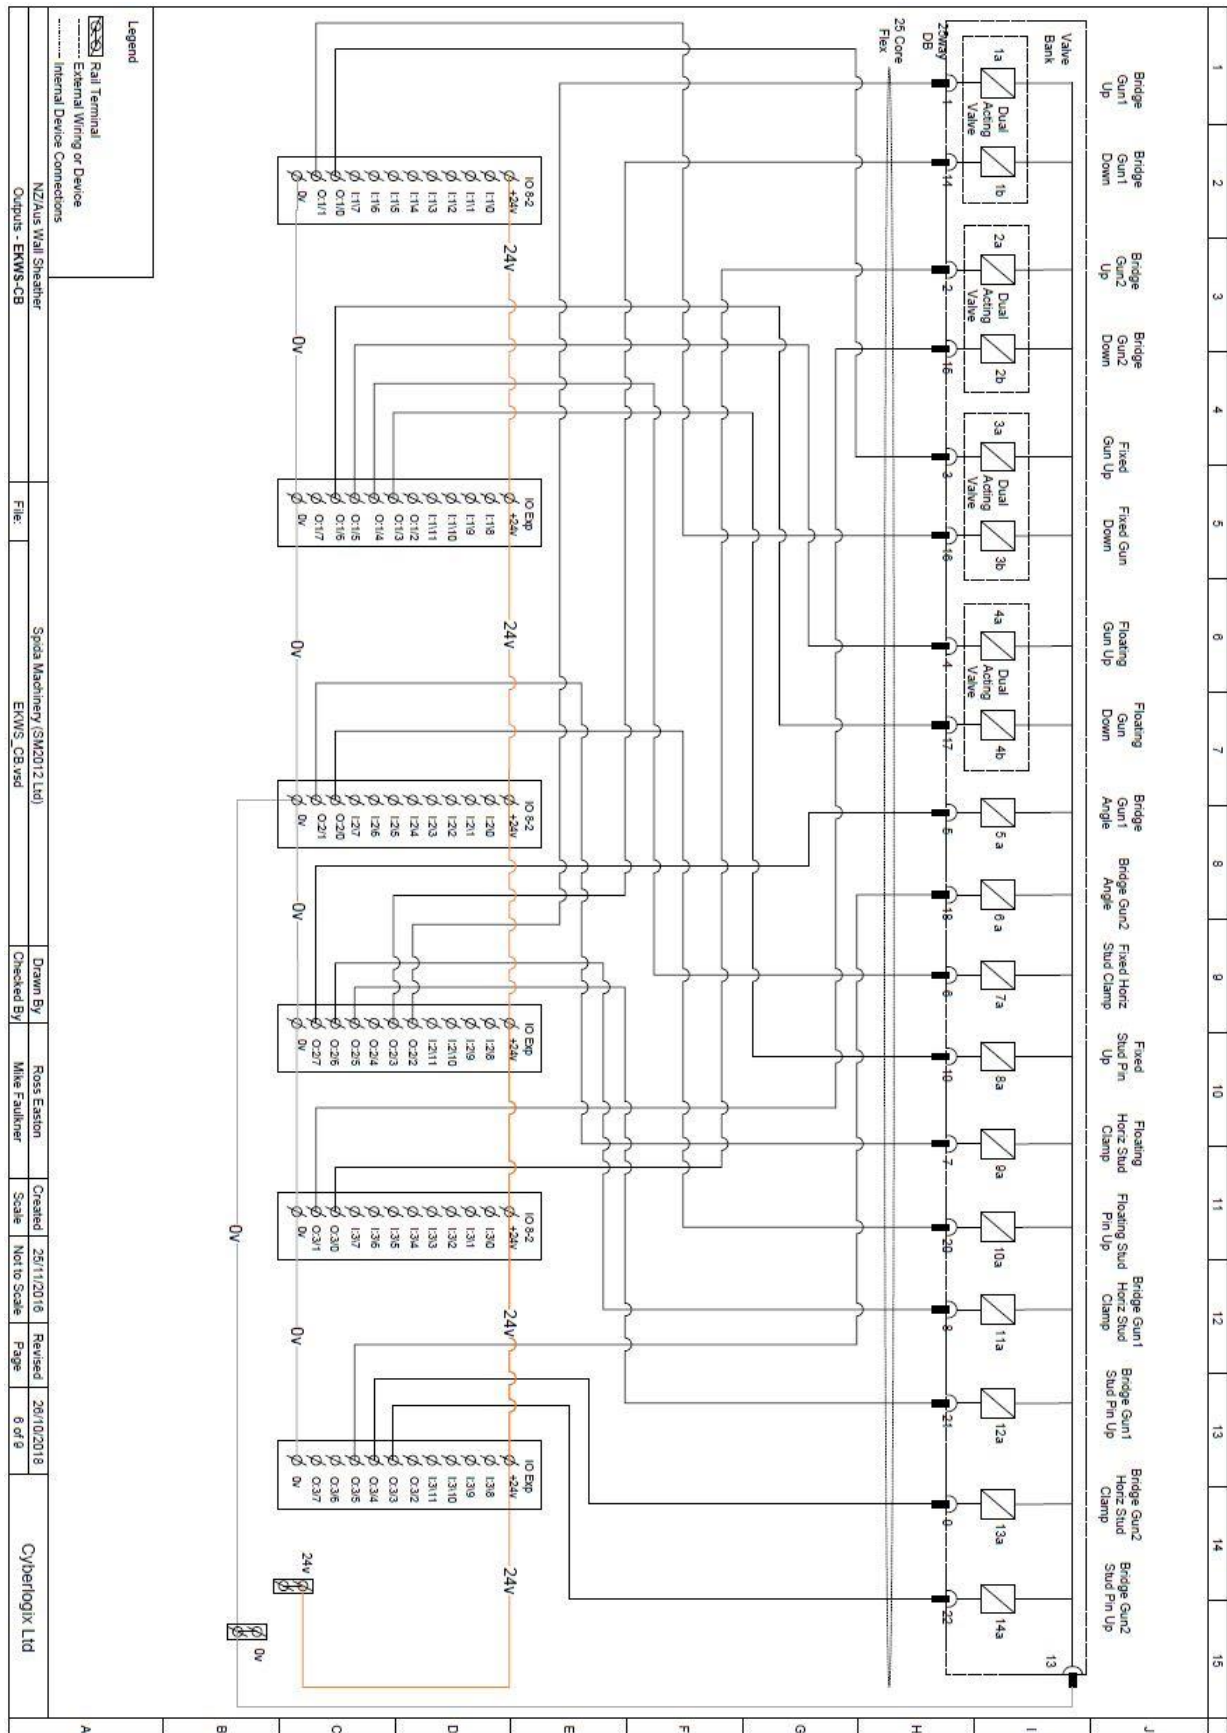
, Spida Auto Sheather Electrical Drawings NZ/AU part 6
